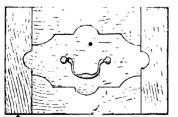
Front of Lower Drawer in Queen Anne Chest.
